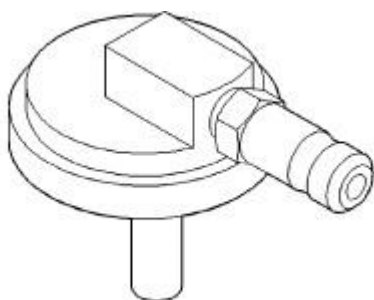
Adapter, Master Cylinder Pressure Bleed Cap 6921
